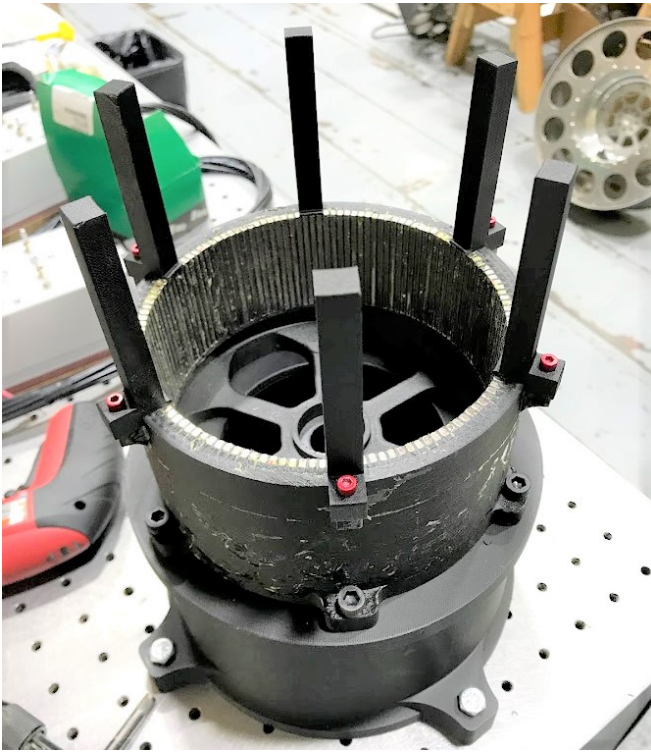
Ring gear bolted to a bench-top with six guide-ways attached to its top ready for assembly with sun-modulator sub-assembly.
